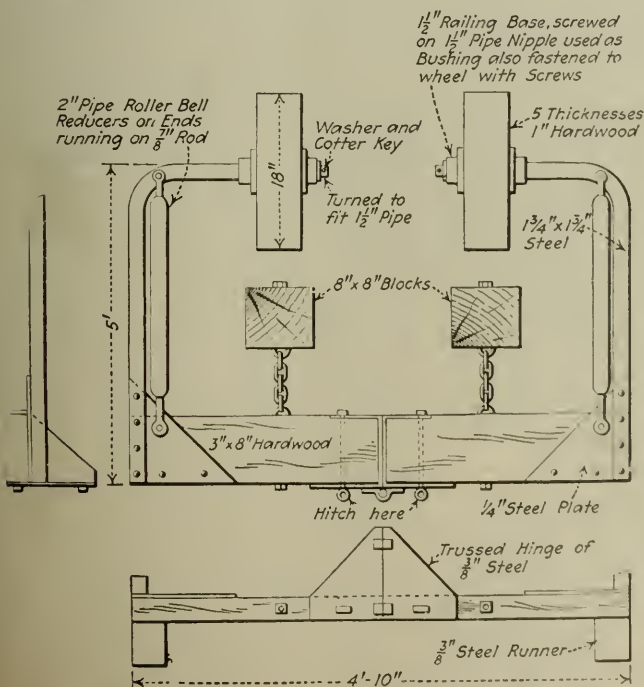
DETAILS OF DEVICE USED IN TRANSPORTING CONCRETE PIPE
